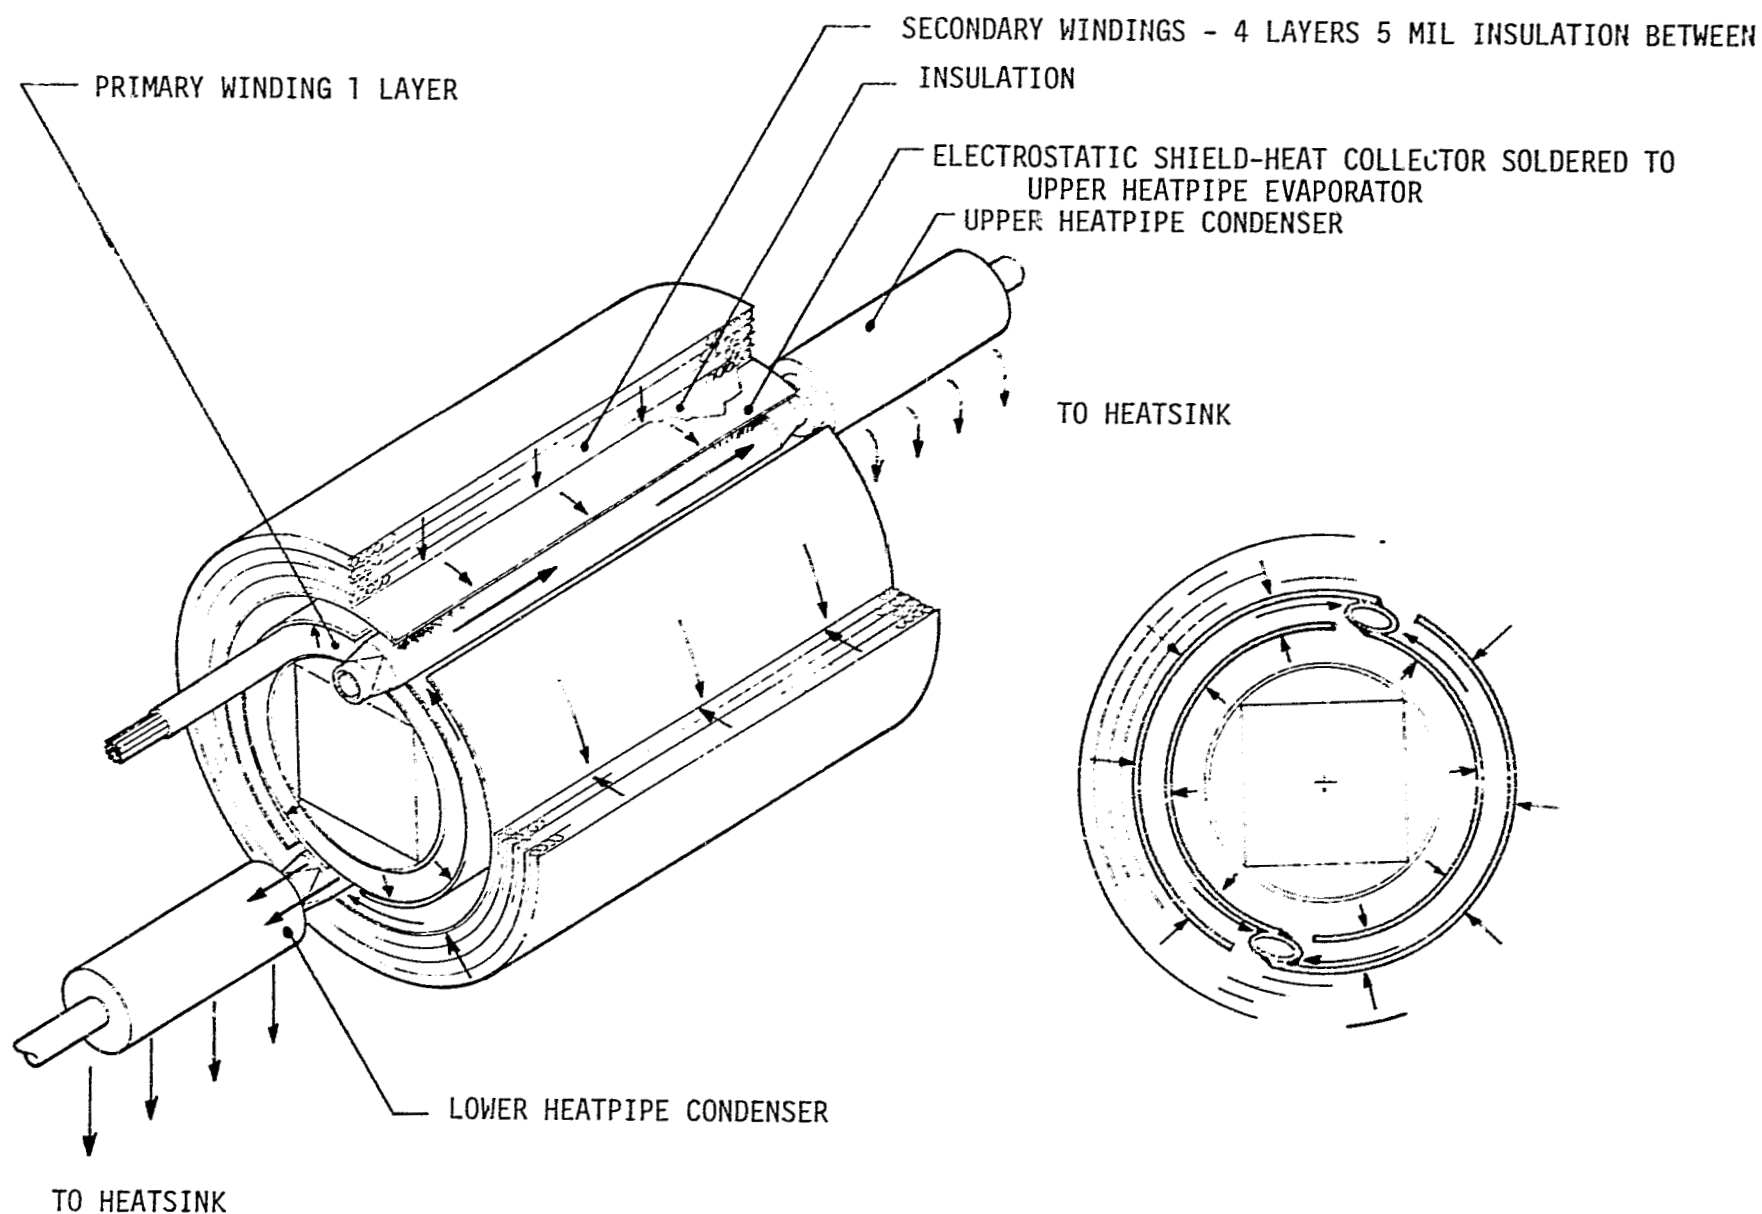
HEATPIPE COOLED TRANSFORMER HEAT FLOW PATHS
